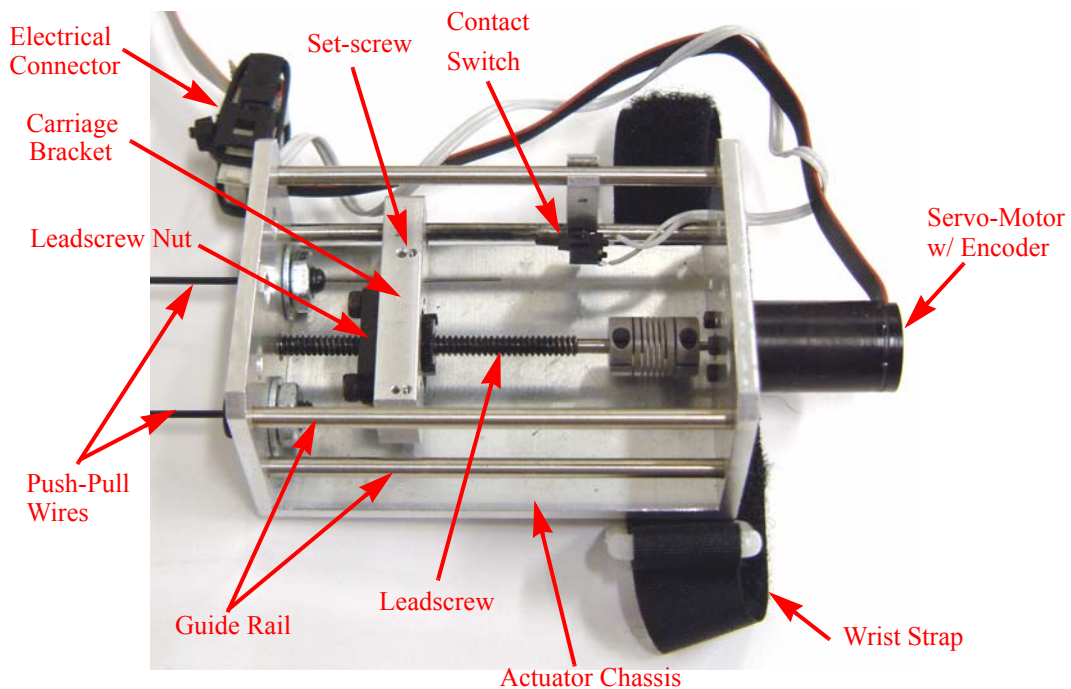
Actuator assembly. A leadscrew couples the motion of the motor to the push-pull wires. The device is calibrated by driving the carriage against a small contact switch at startup.
